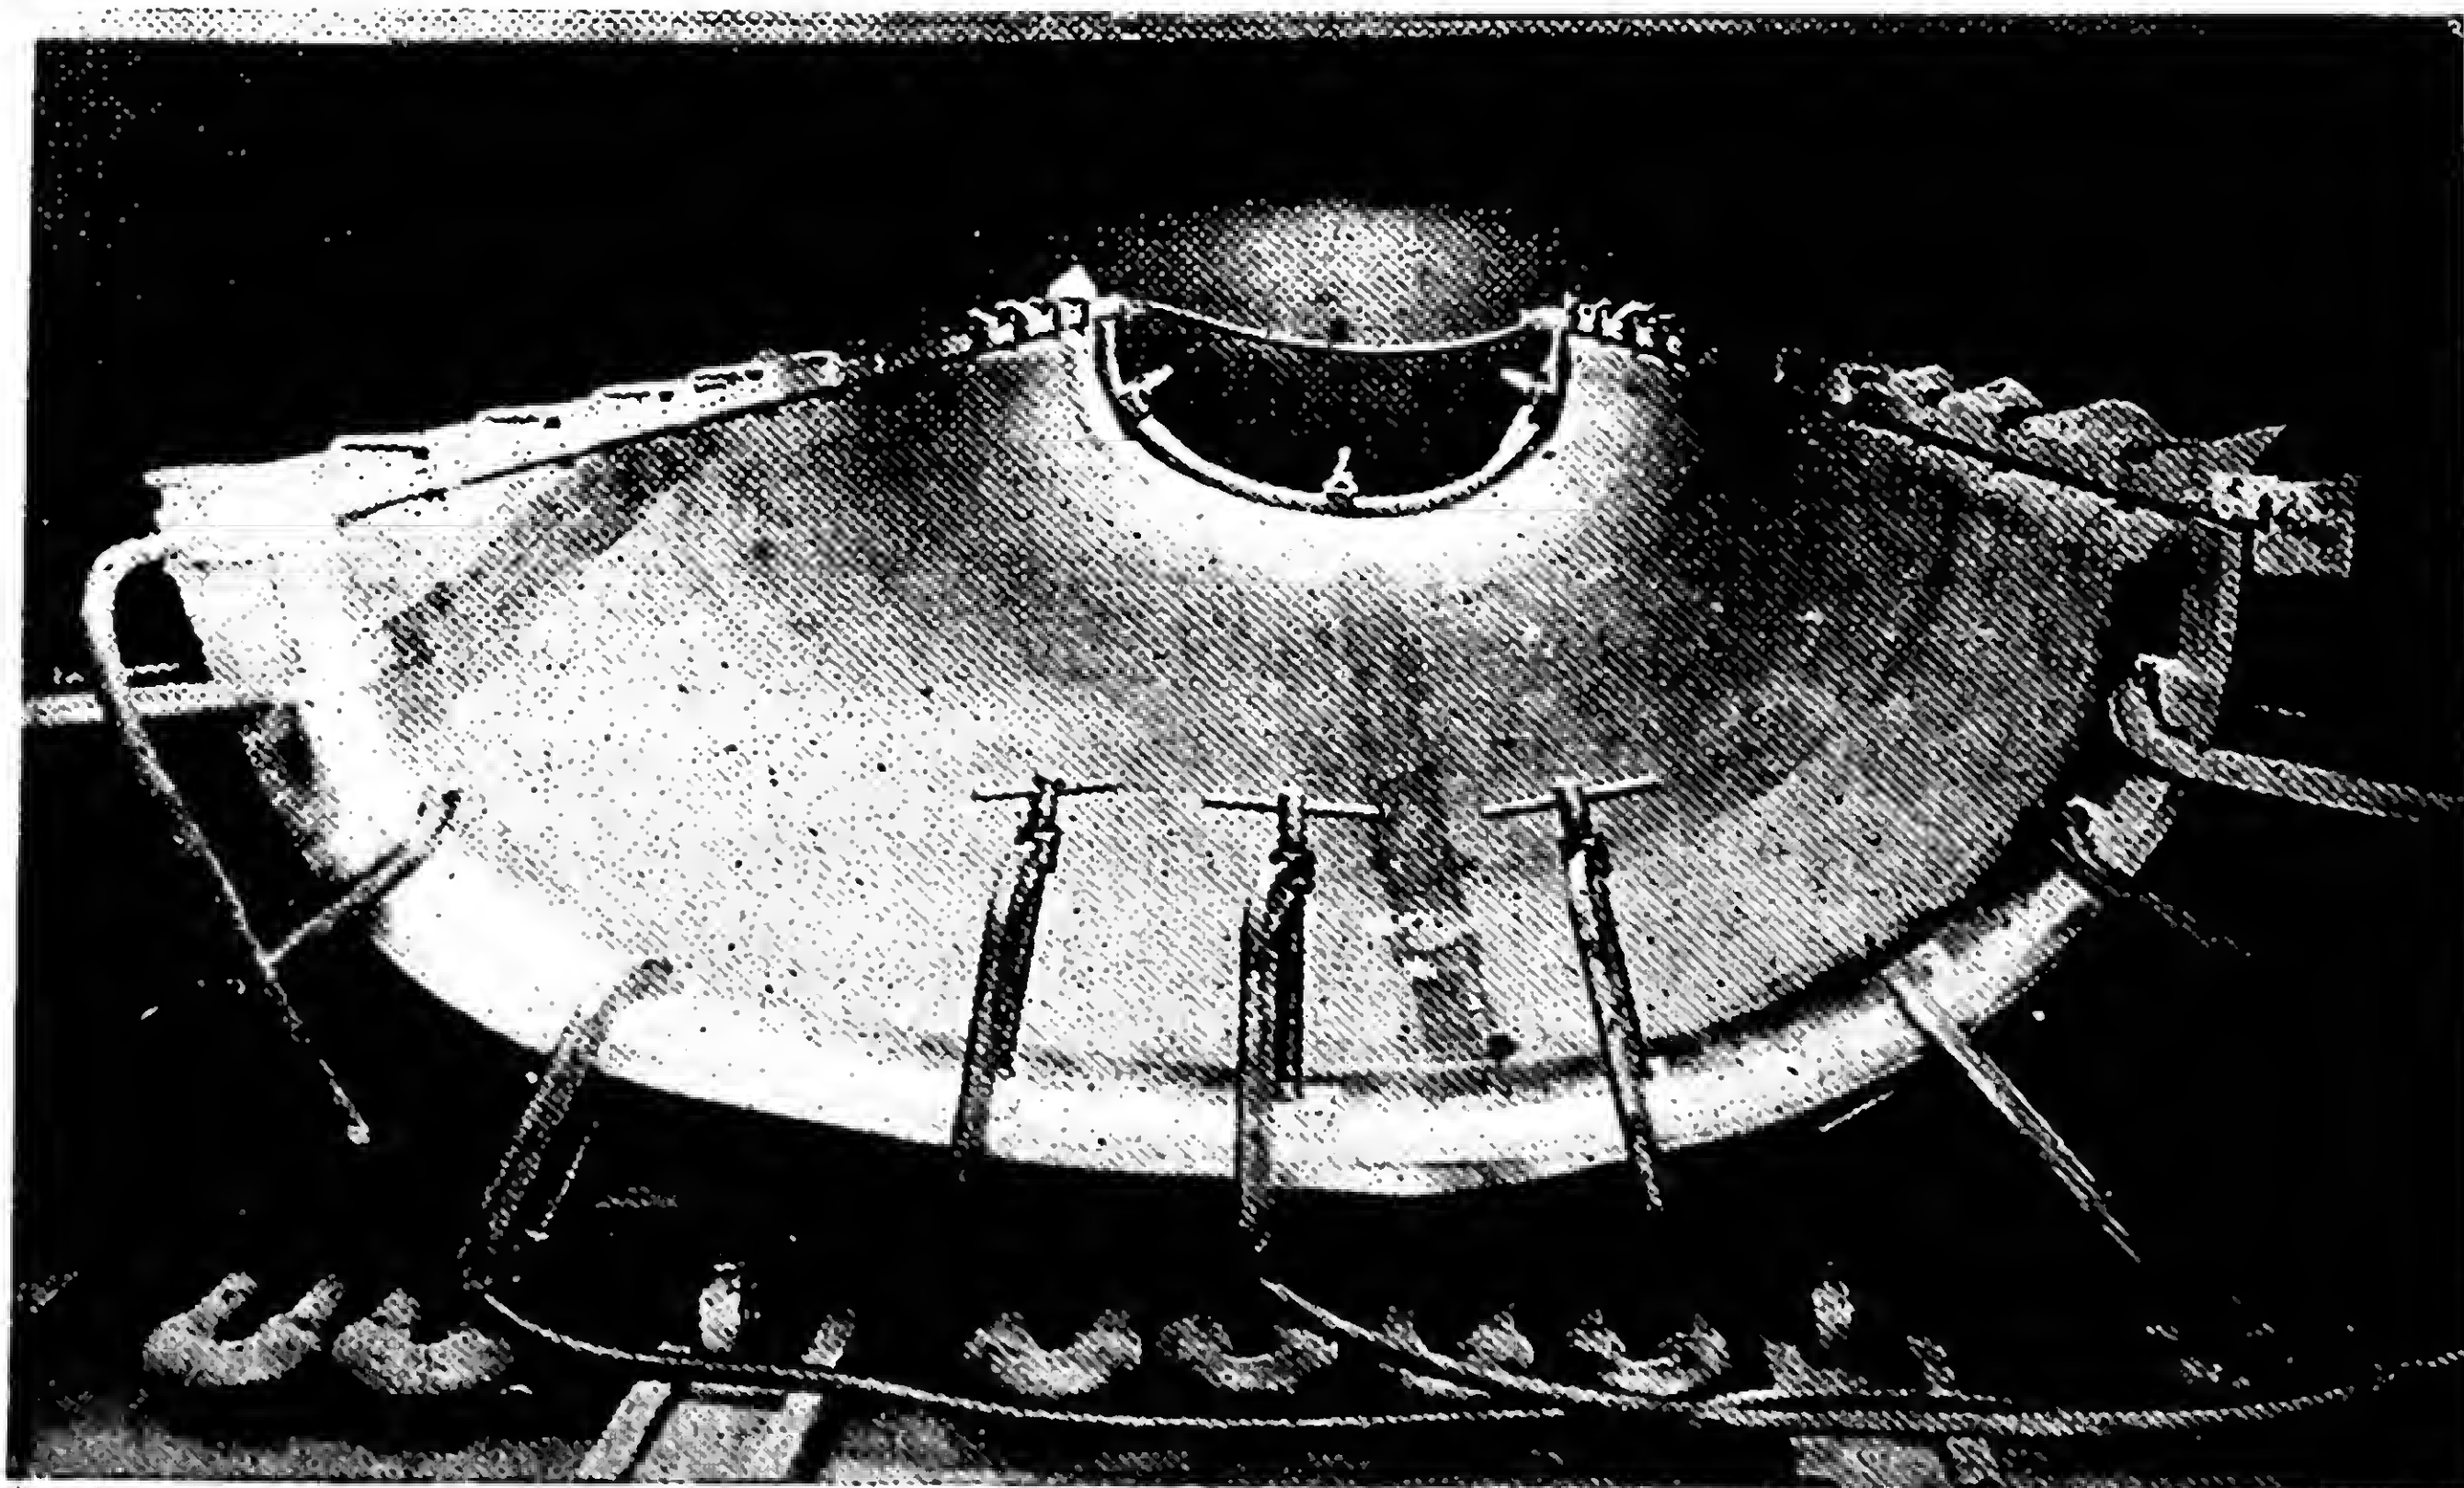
Another mold covered with a flexible blanket, held in place by means of metal clamps.
